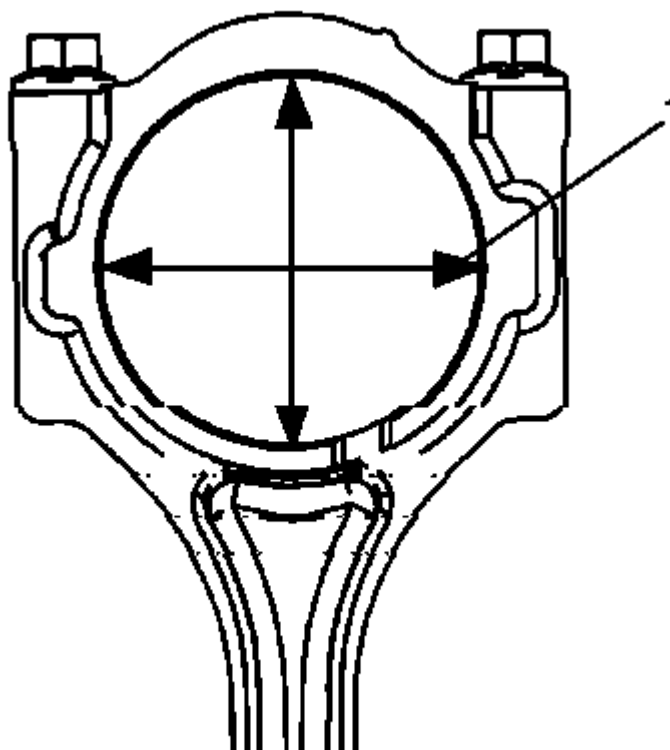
Identifying Connecting Rod Crankshaft Bearing Bore Measurement From Inside Micrometer
